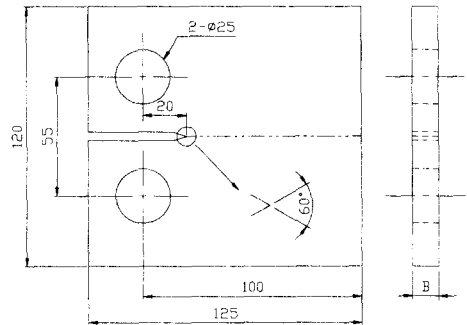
Shape and dimensions of CT specimen (unit : mm, B = 6, 12, 18mm)
